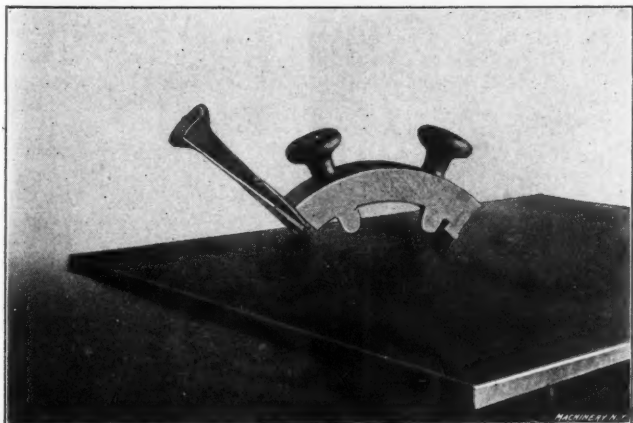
Indicator for Inspecting the Location of the Locking Bolt Blocks
